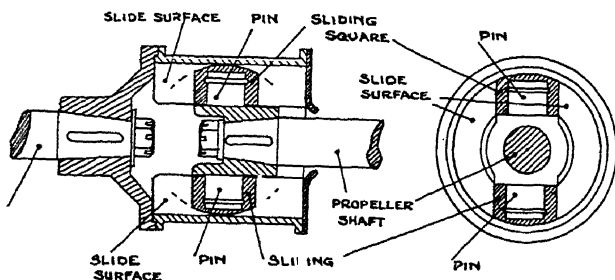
Plunging, or Sliding Type Universal Coupling.
